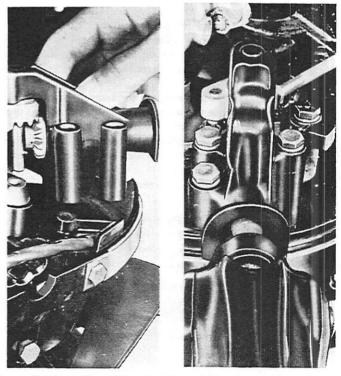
Installing Throttle Control Bracket Figure 6. Revised Dec. 1964 Section VIIIC – Miscellaneous
